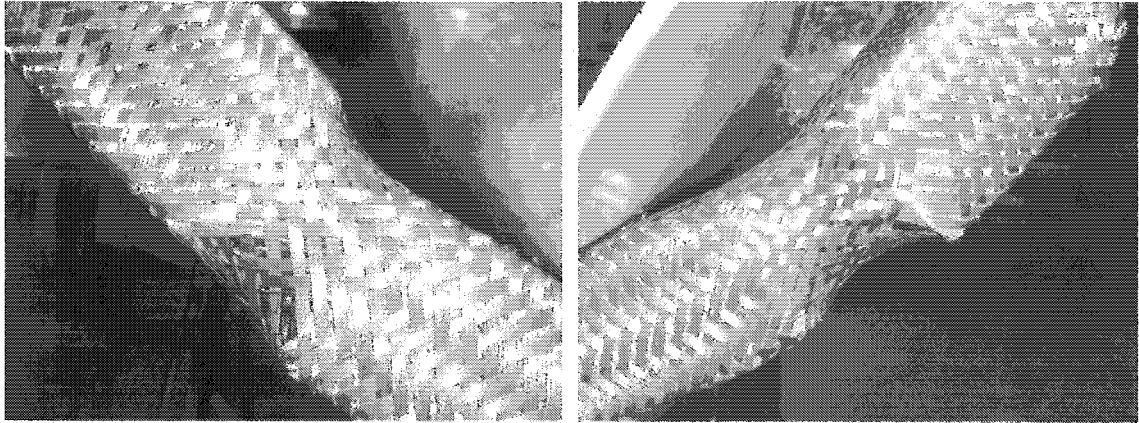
Tube elongation due to spaces between the foam bricks within the specimen
